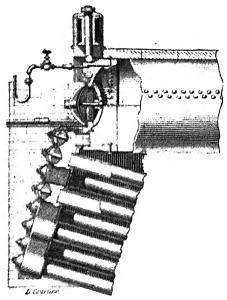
Arrangement of tuber in the Babcock and Wilcox boiler.
